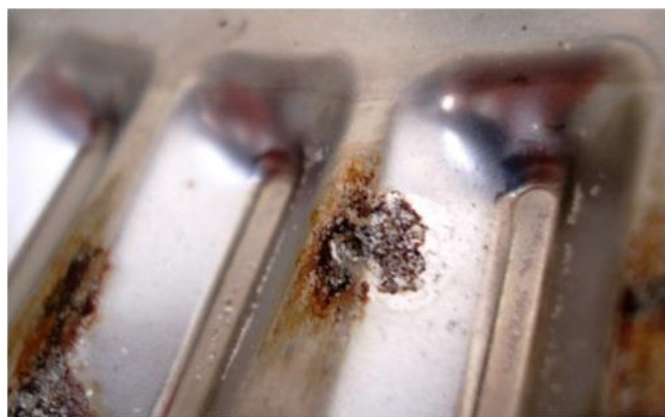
Pitting corrosion on the border area of failed heat exchanger plates [26].
